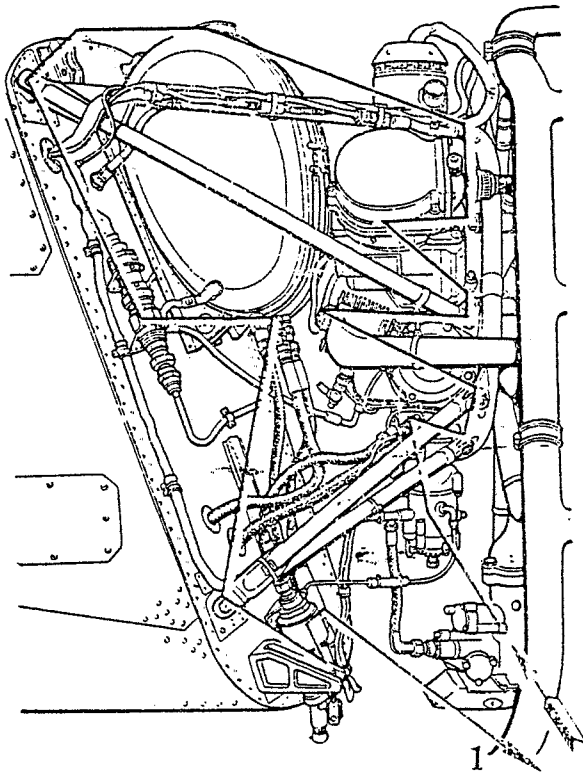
Inspection Circuit for Engine Rear Right Side
